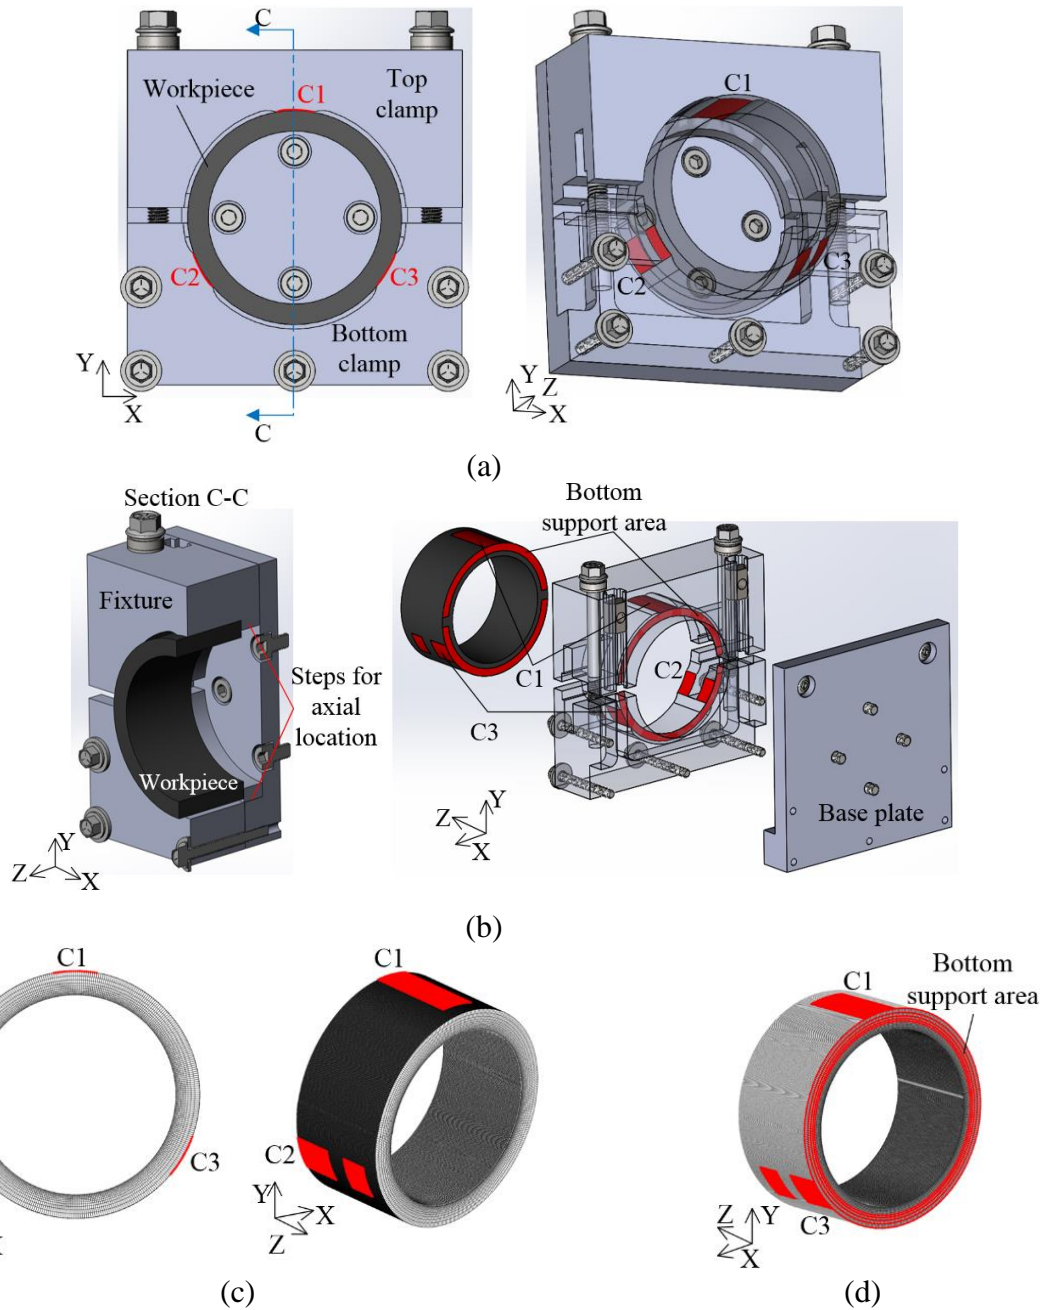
FEM boundary conditions for thermal expansion modeling: (a) three clamping areas, (b) cross-sectional and exploded views of the workpiece bottom support area, (c) three clamping areas in workpiece FEM mesh, and (d) bottom support area in workpiece FEM mesh.
